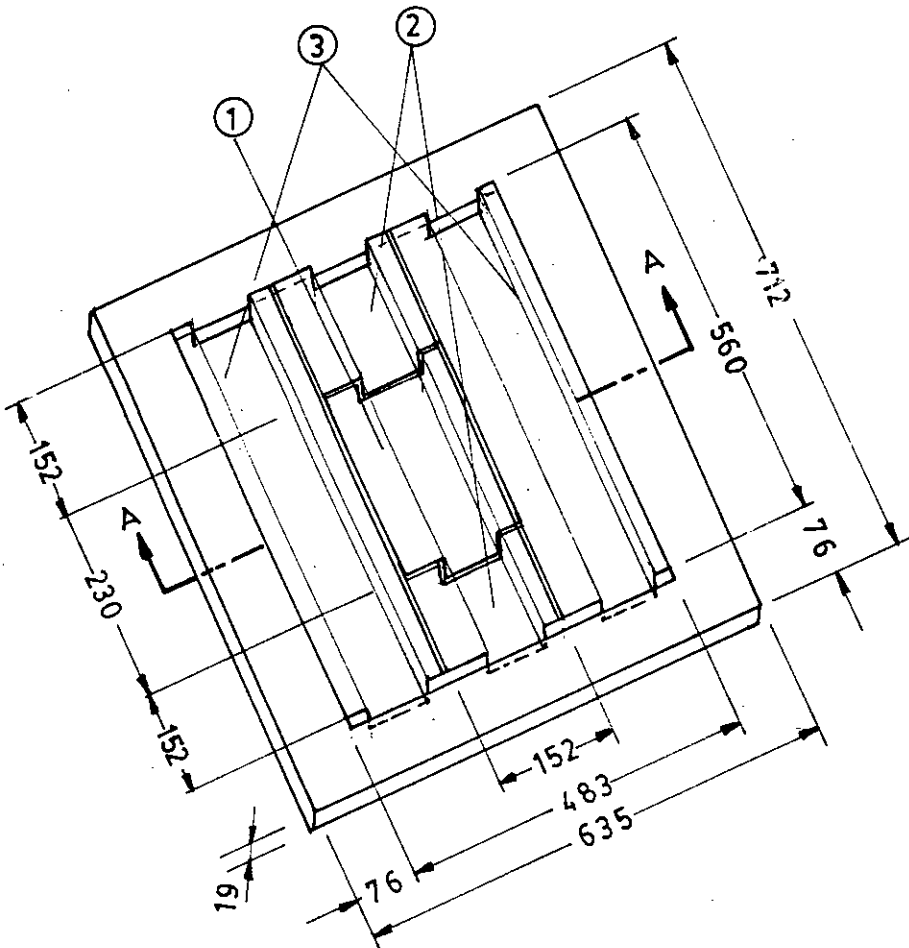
DETAILS OF HOT PLATE ASSEMBLY FOR TRAPEZOIDAL CORRUGATION
